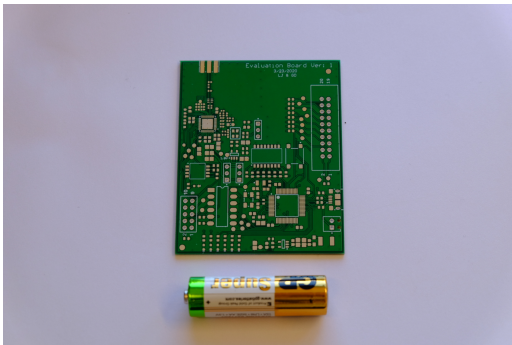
Evaluation board PCB before mounting of components. AA battery for size reference.
